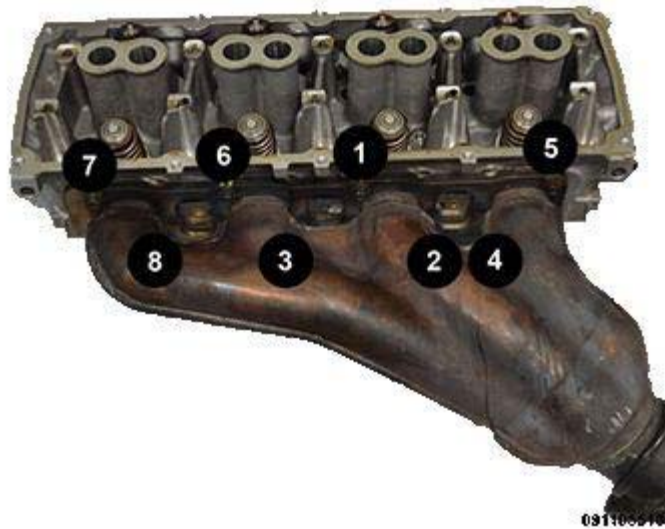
Exhaust Manifold Removal/Tightening Sequence
